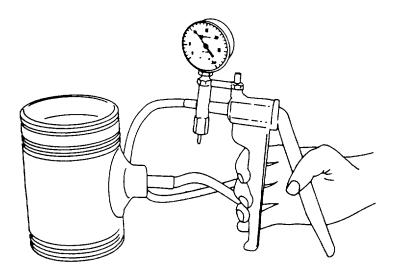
Checking Piston Pin Retainer for Proper Sealing Using Tool J23987-01.
